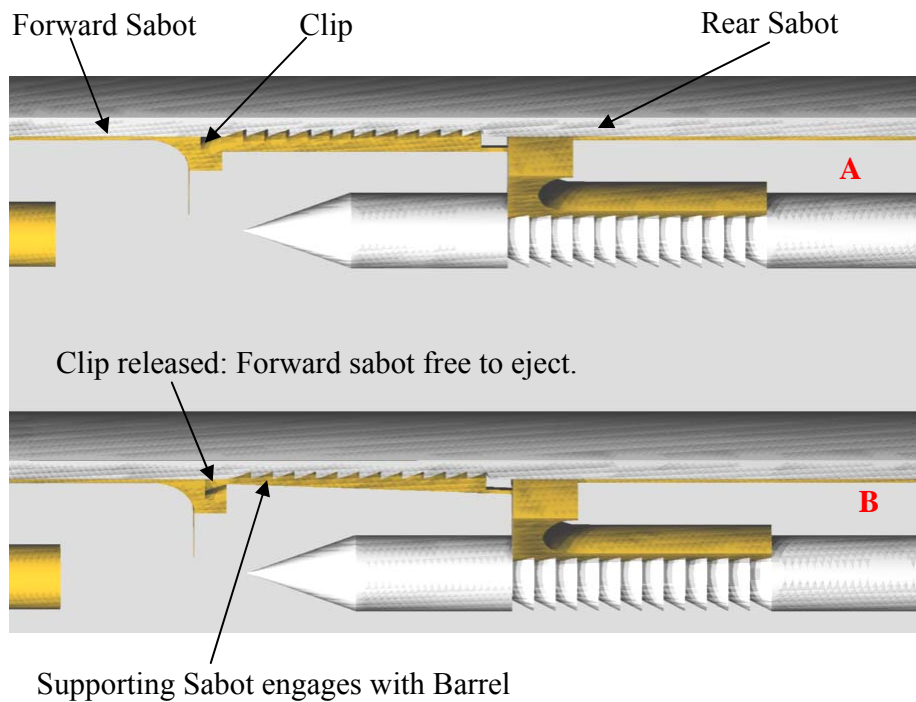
Detail of Segmented Sabot Locking Mechanism and Clip.
